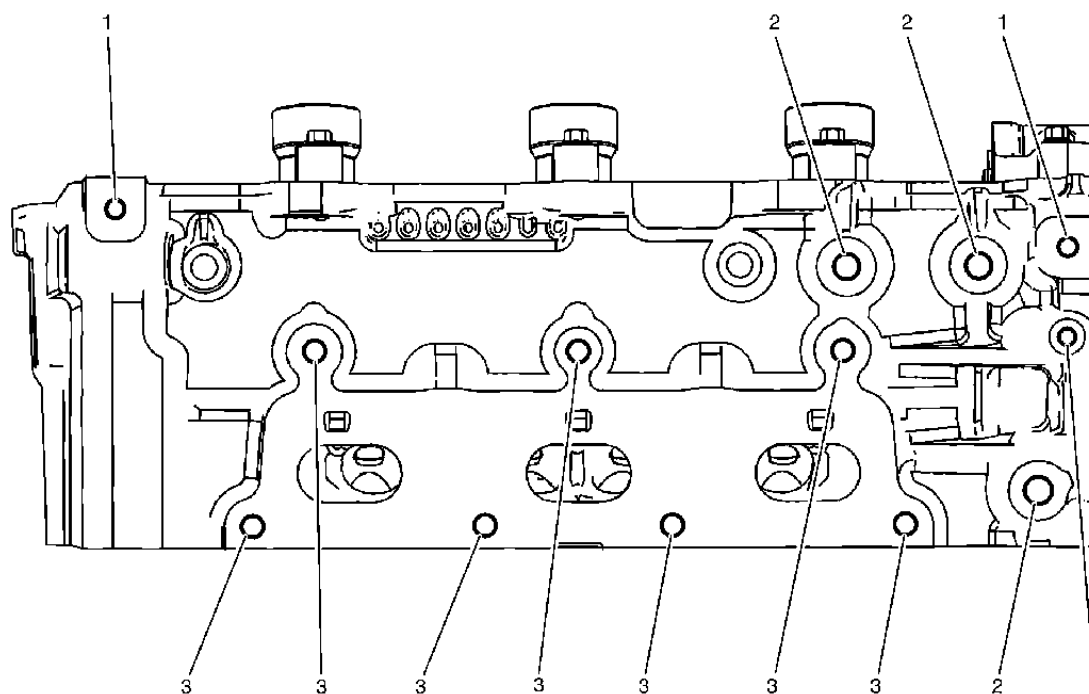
Identifying Right Cylinder Head Intake Face
